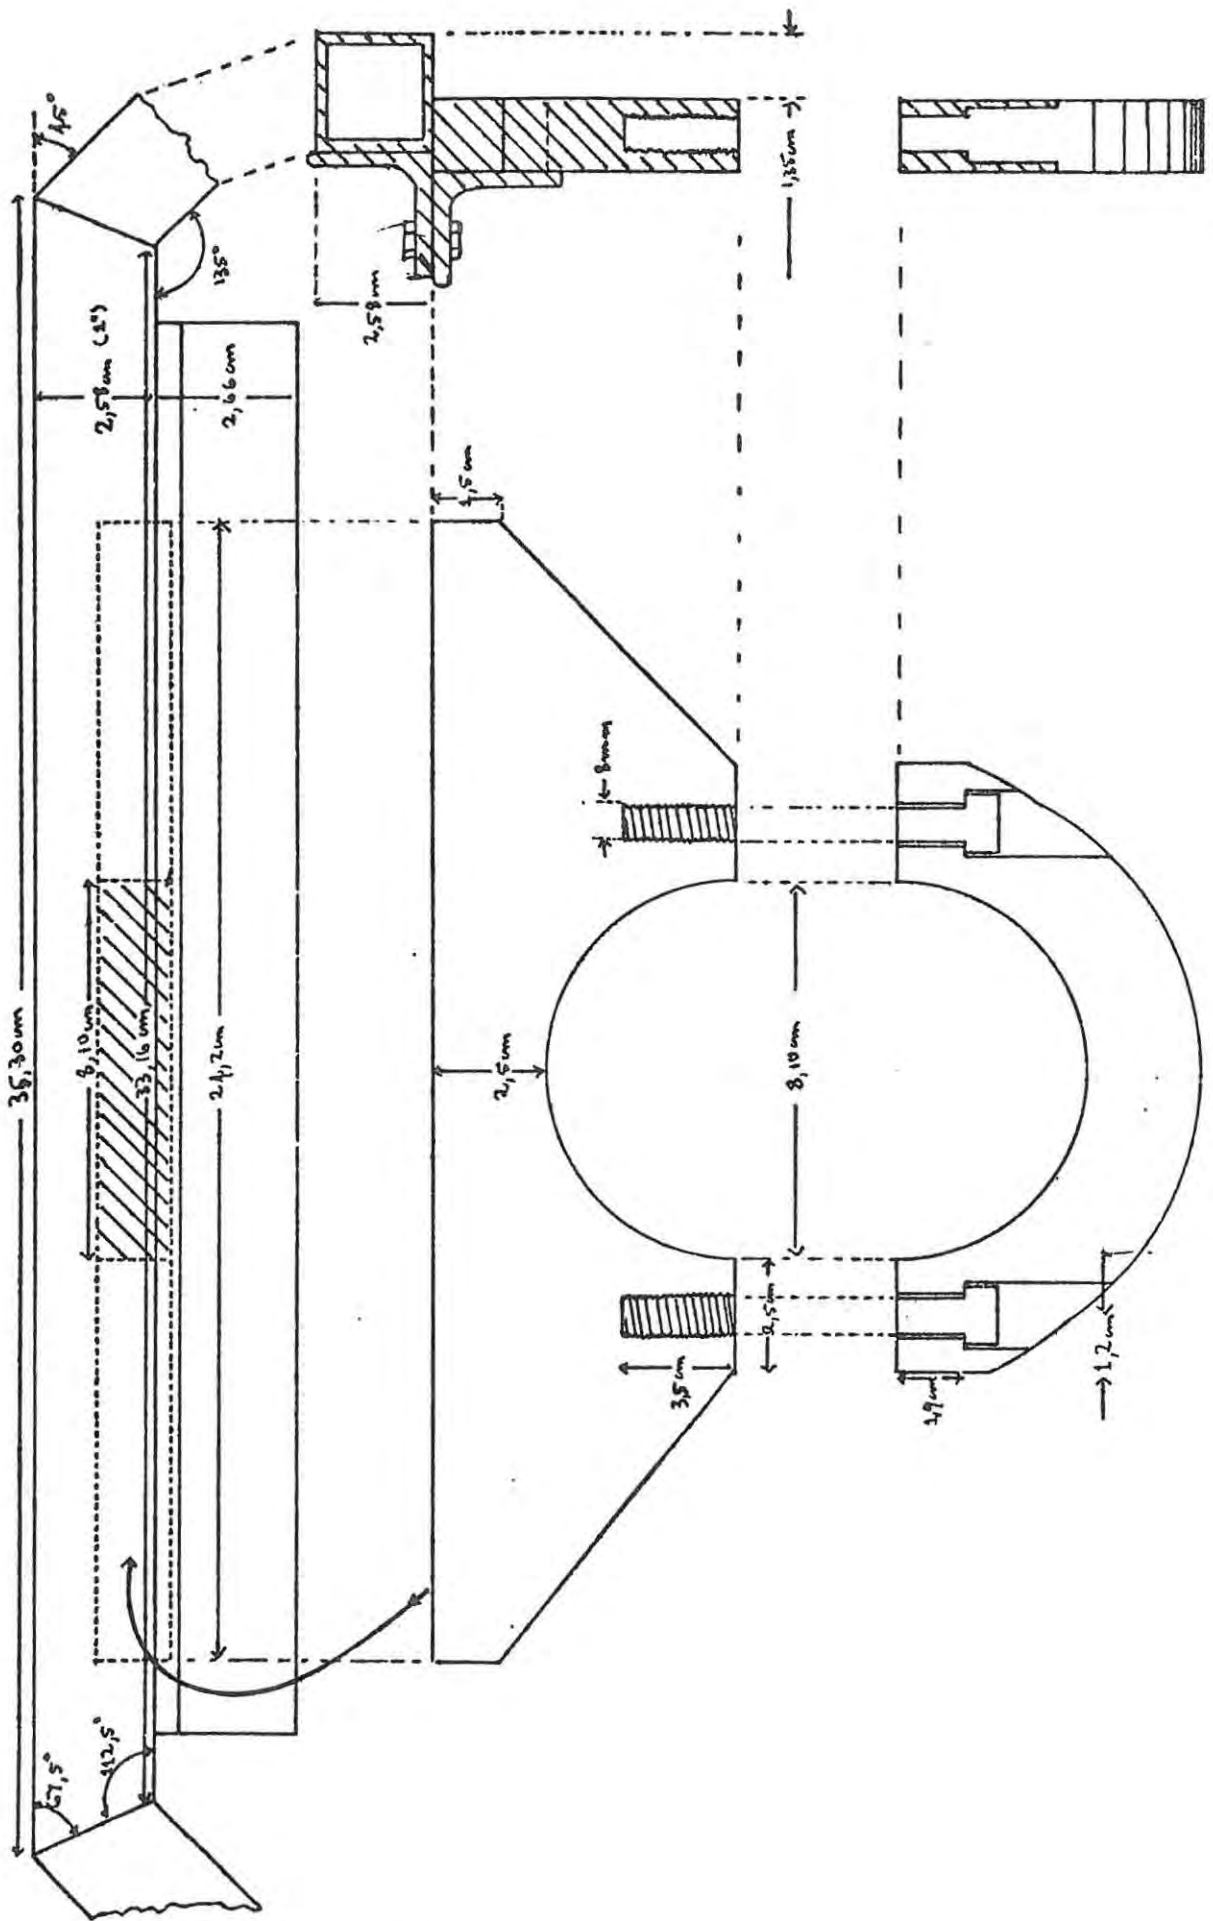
DETAILS OF BEARING MOUNTS.
